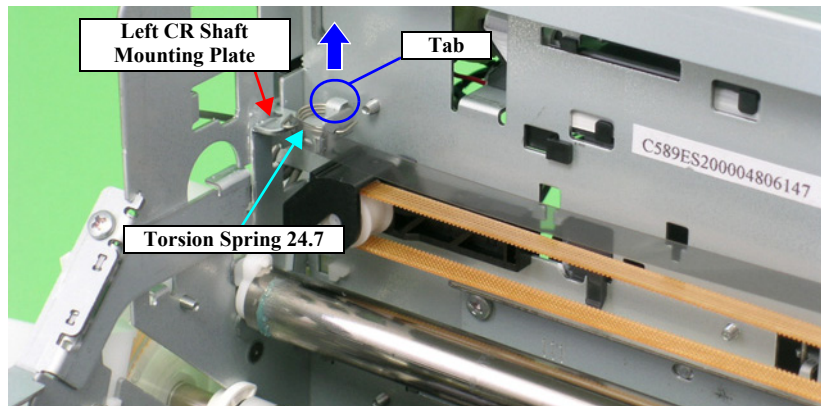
Removing the Torsion Spring 24.7 (1)
